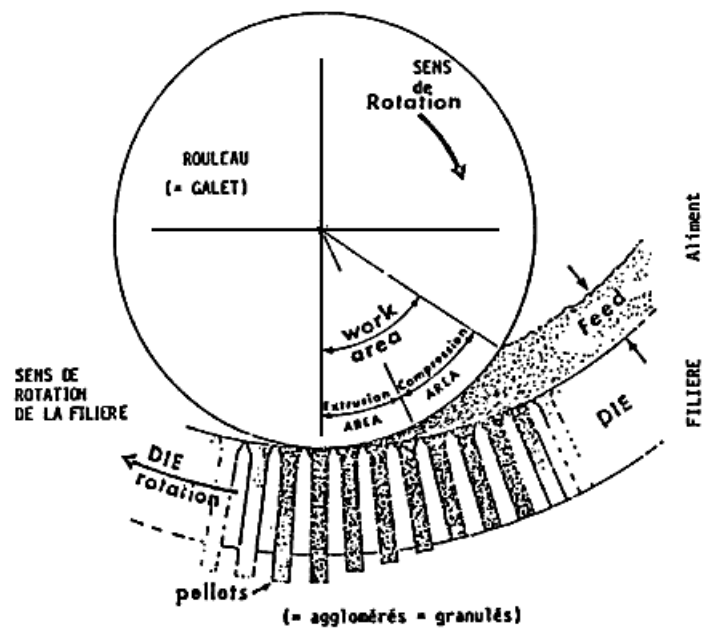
THE DIE AND ROLLER ASSEMBLY
